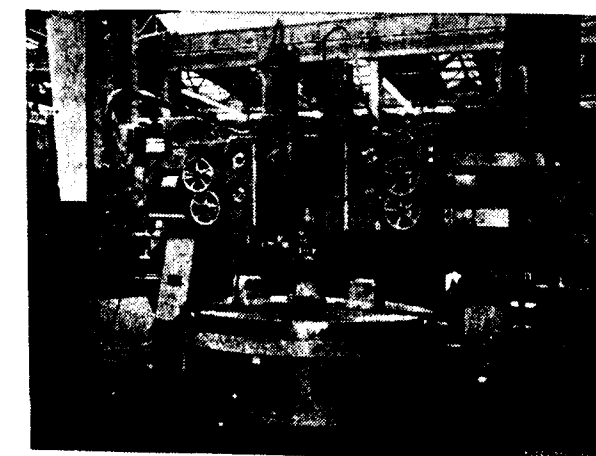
Type RRK Automatic Tyre Lathe with mechanical work clamping fixture.
